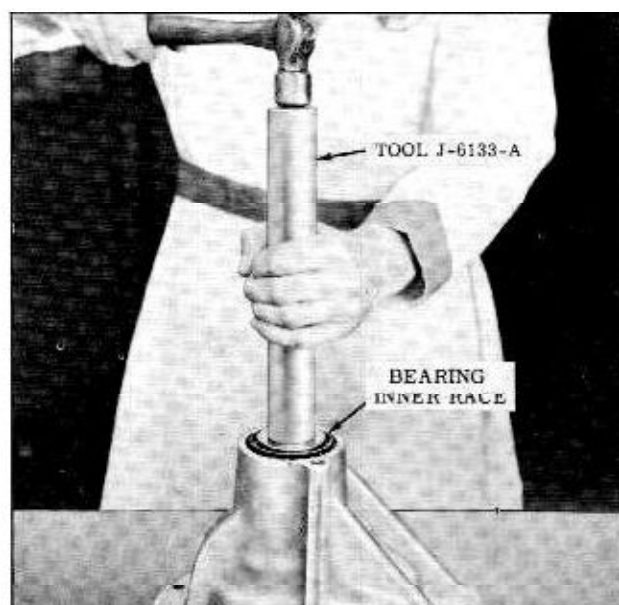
Installing Front Pinion Bearing Inner Race
